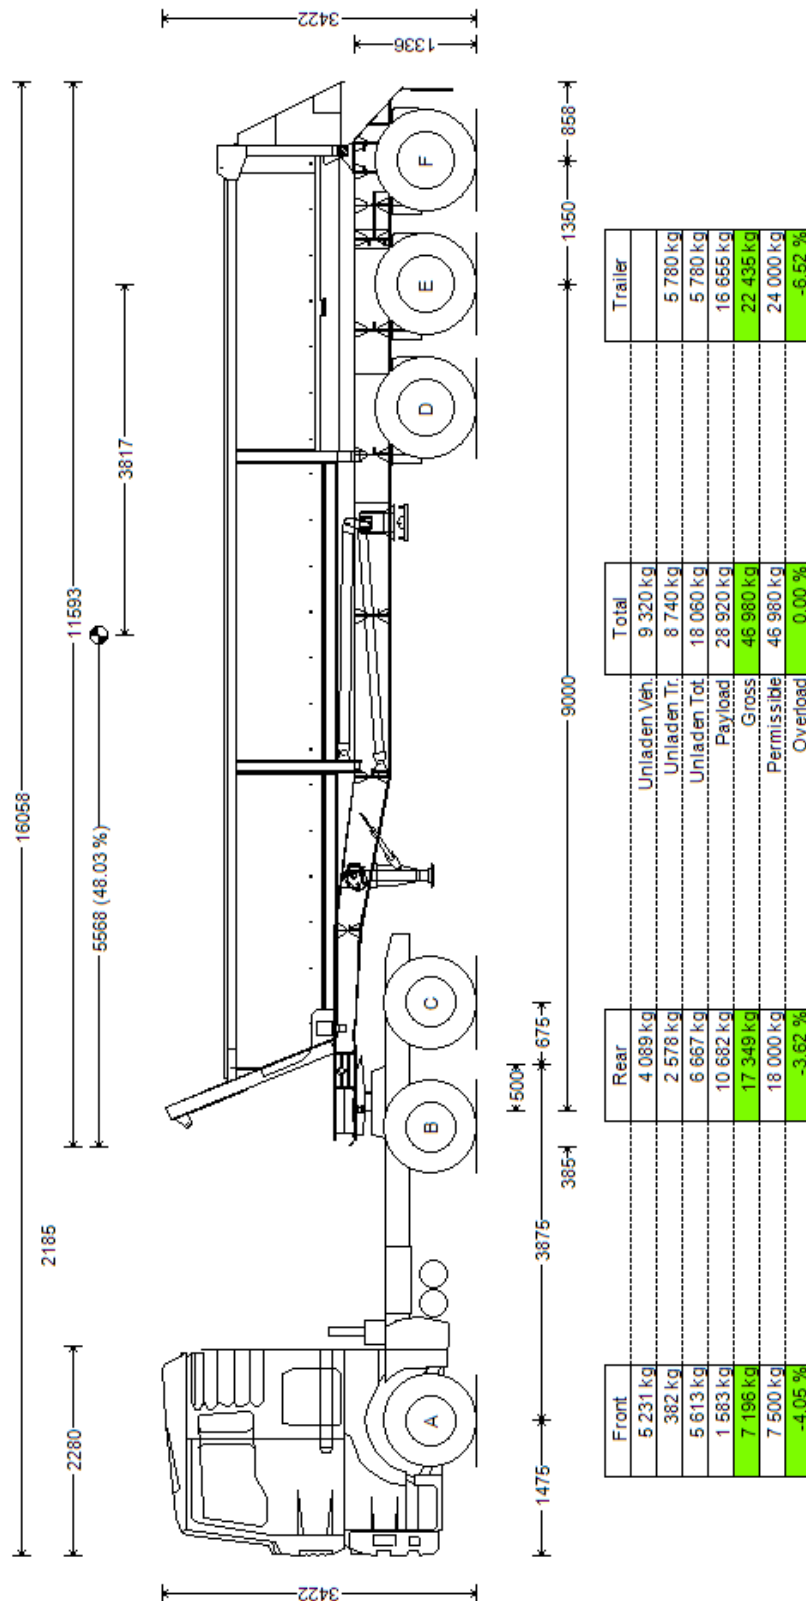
Layout dimensional drawing of Tipper semi-trailer
